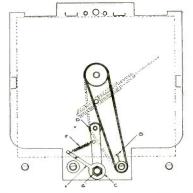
Front view of Models 787, 879 and 1171 dial mechanism.
